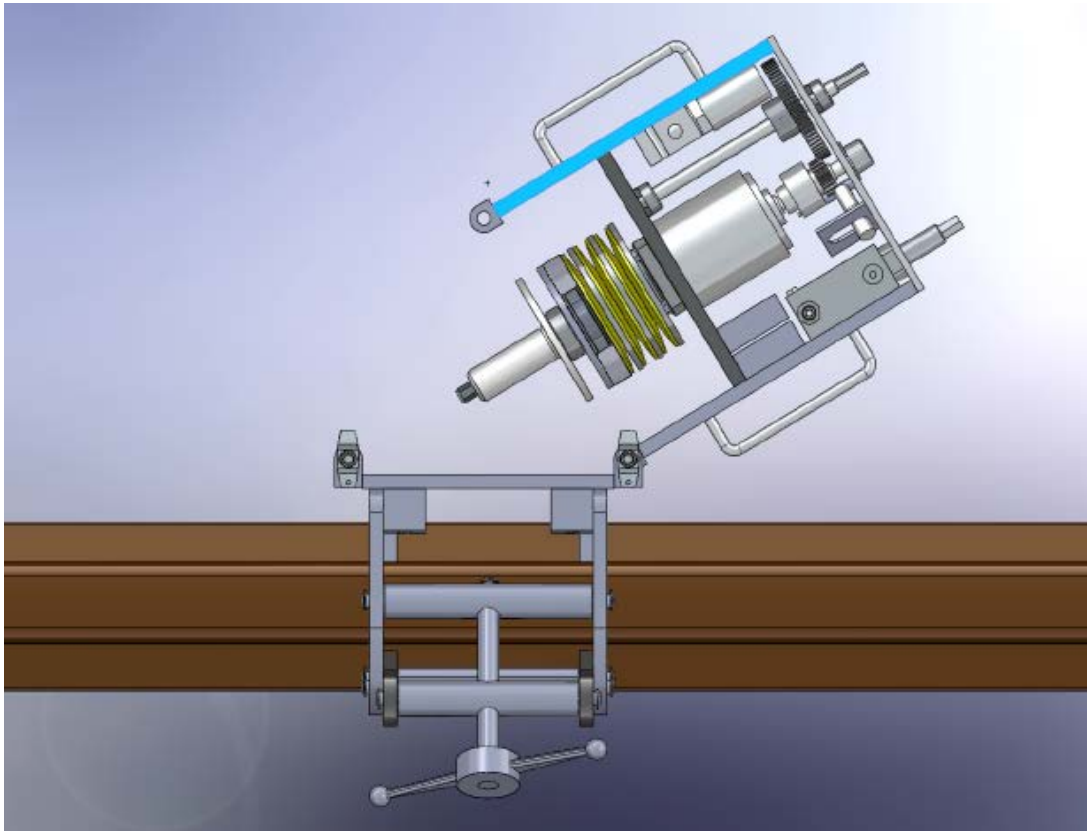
Top View of Welder Opened for Change from Spot Face to Weld Setup
